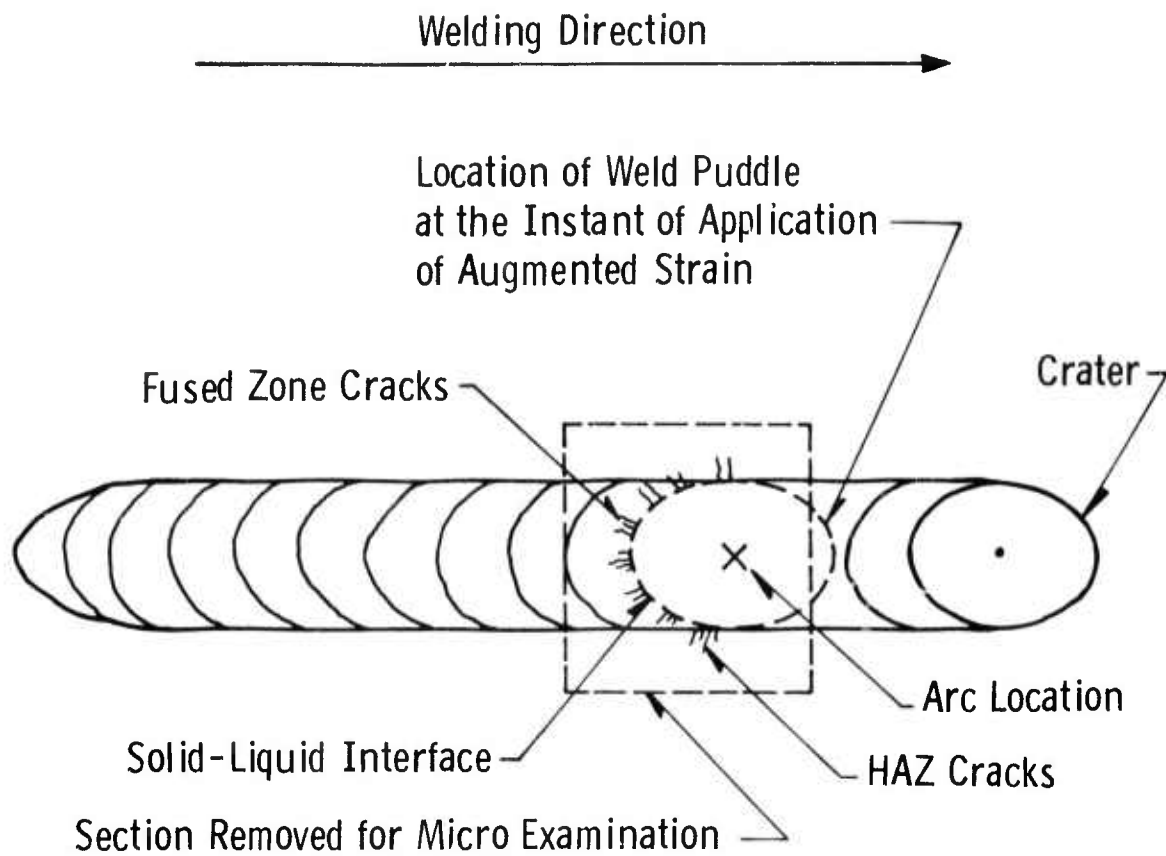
Schematic representation of the top surface of the weld and the section removed for metallographic examination
